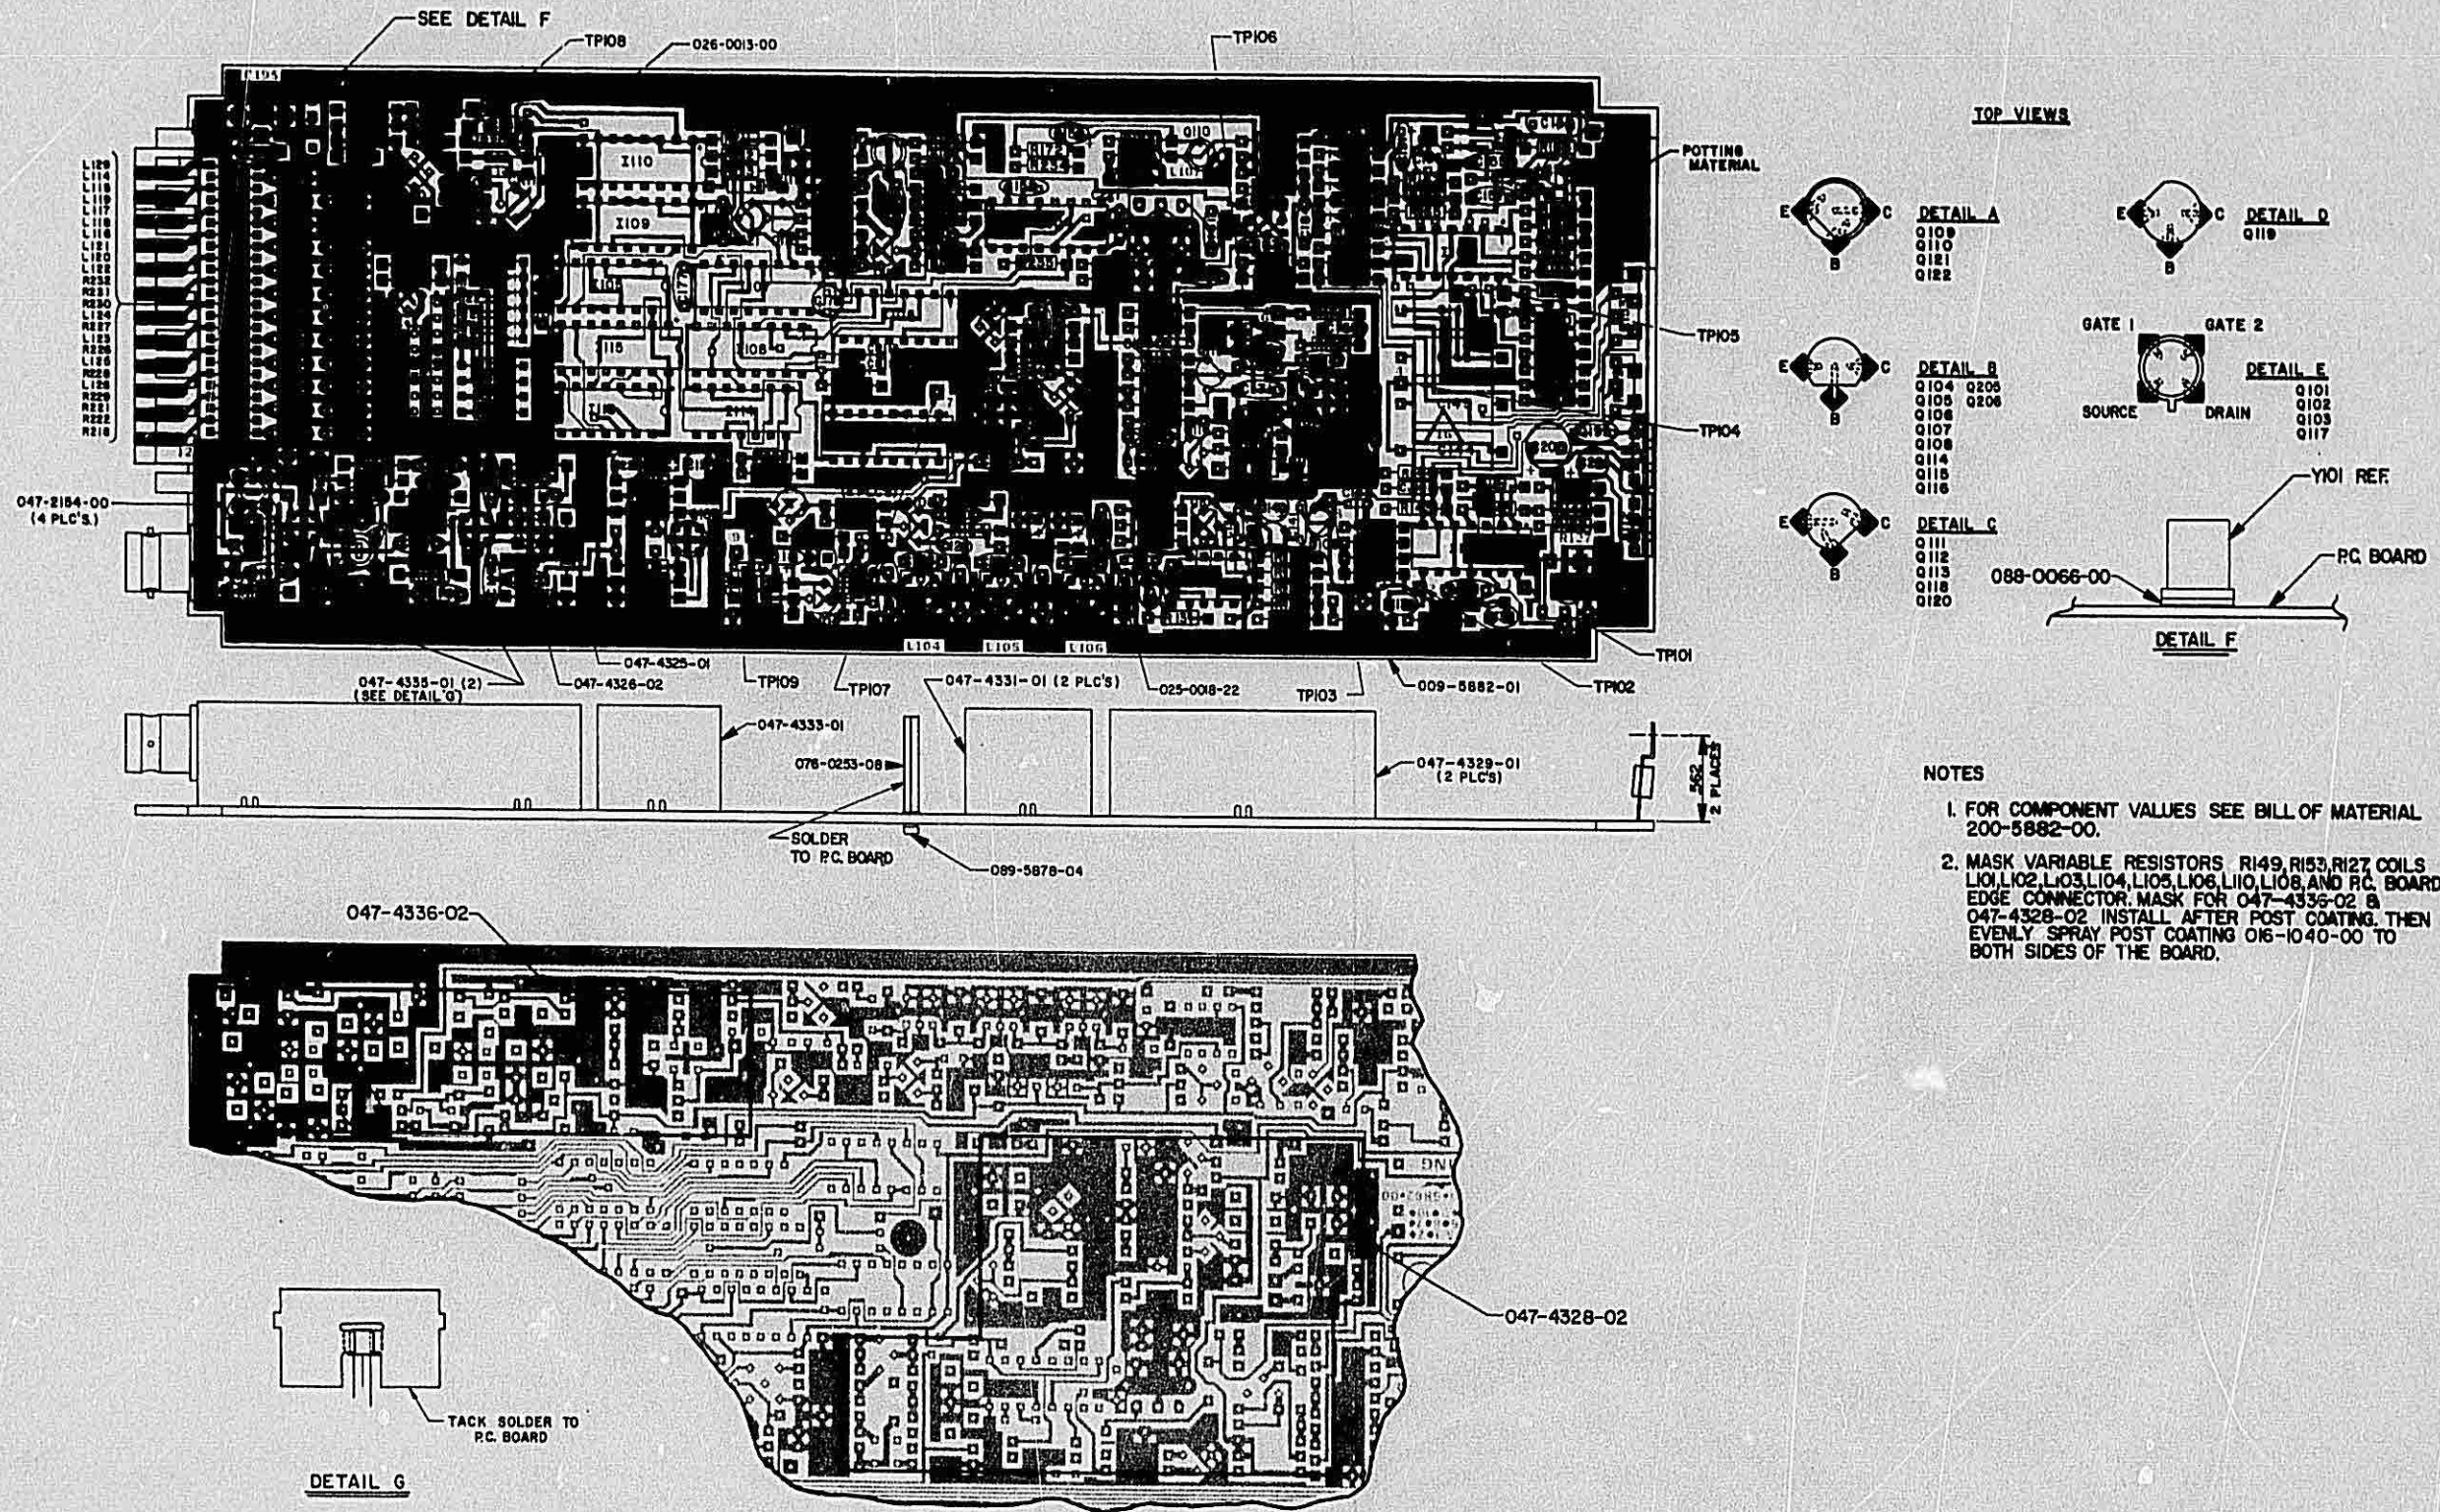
P.C. BOARD ASSEMBLY DRAWING
